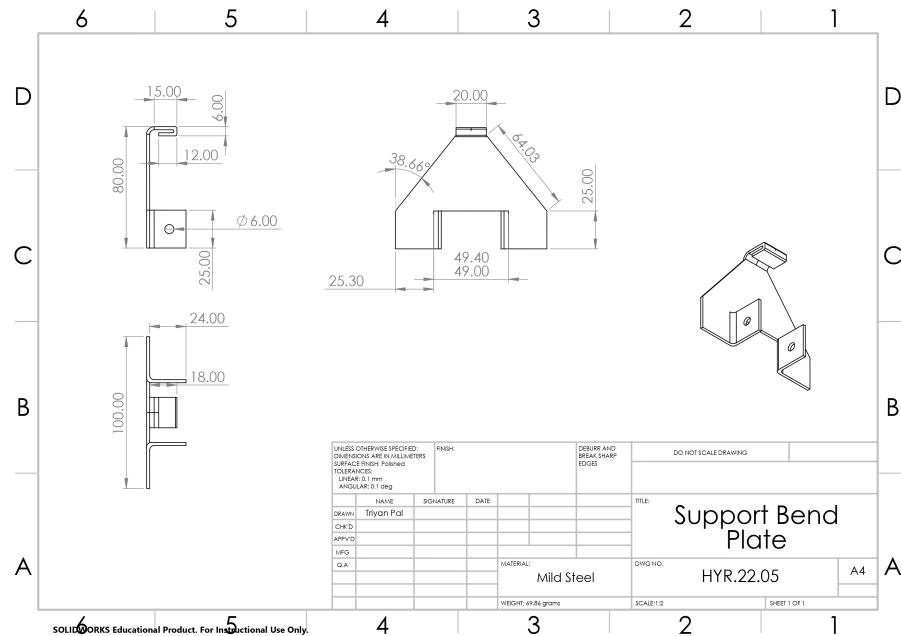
Engine Chamber Ring Clamp System Support Plates. Source: Own.
